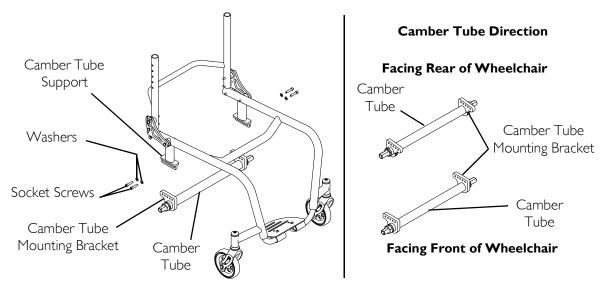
Reversing the Camber Tube Mounting Bracket Direction
